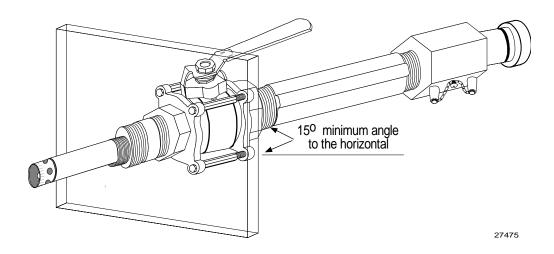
Final Position of Inserted Tube in Pressurized Vessel
